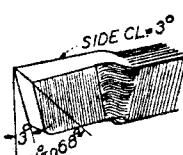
Increasing the angle of the cutting edge on a side finishing tool will often stop chatter, provided the tool and the work are clamped tightly.
